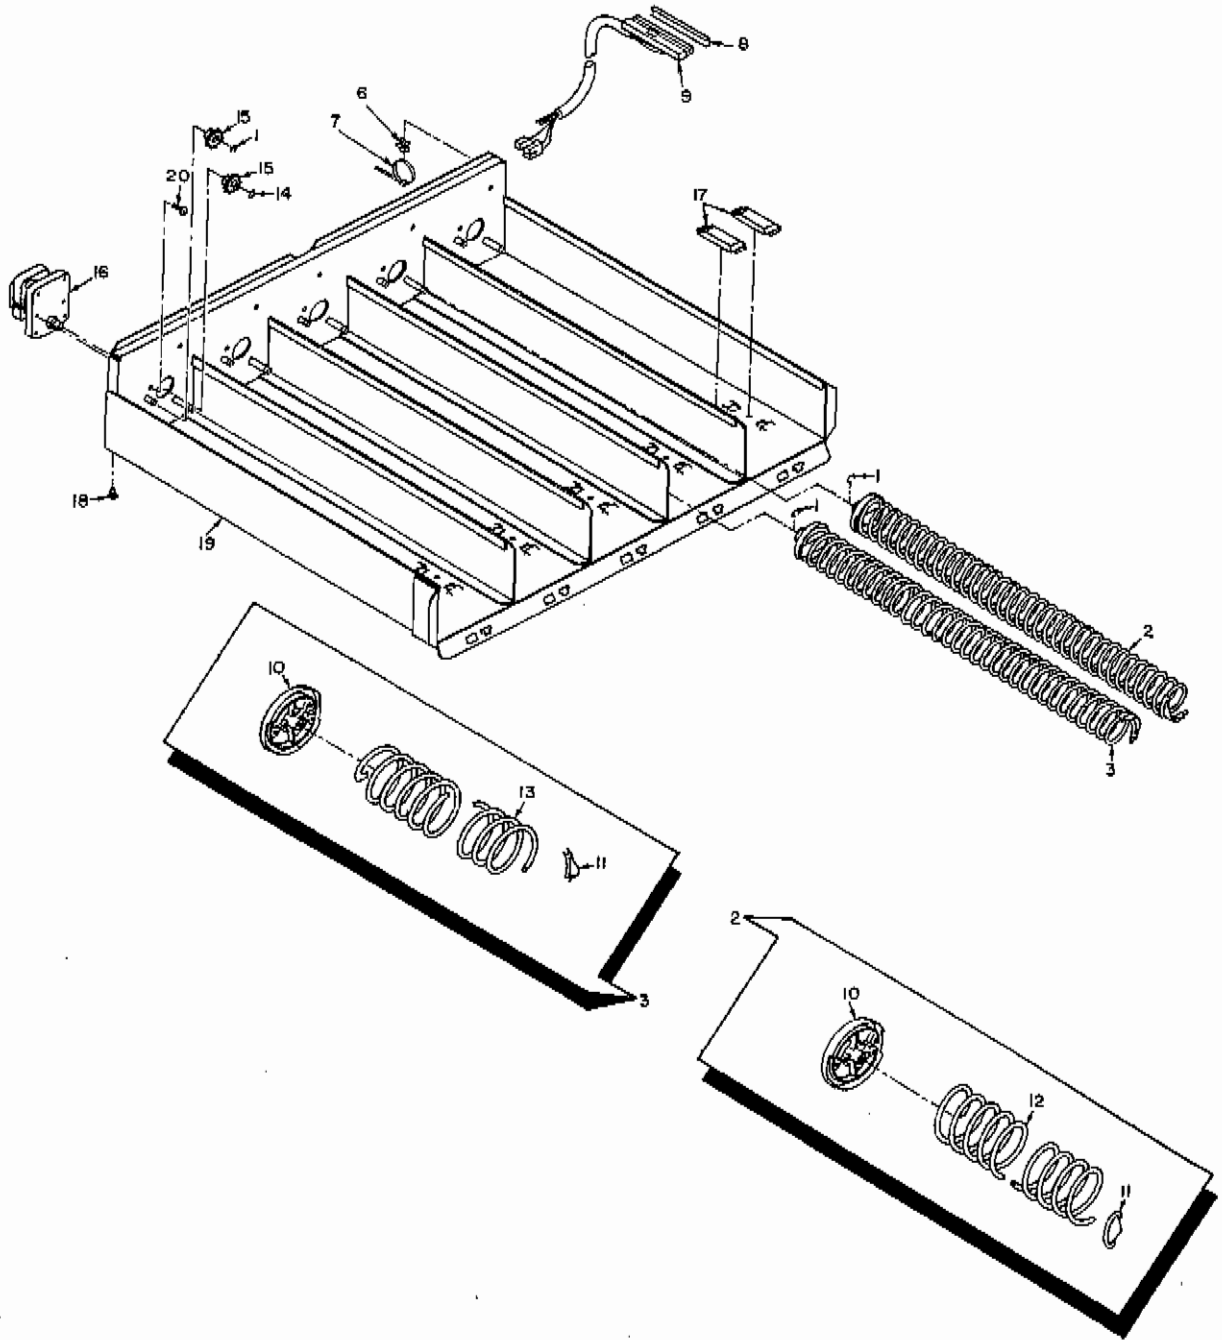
TOP TRAY ASSEMBLY COMPLETE
